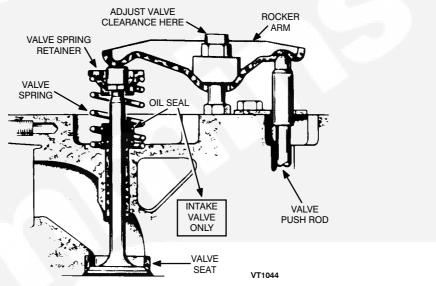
VALVE CLEARANCE ADJUSTMENTS
